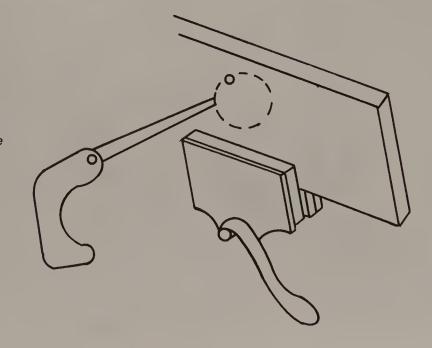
Bore a hole in the waste side of the stock when making an internal cut with the keyhole saw.
